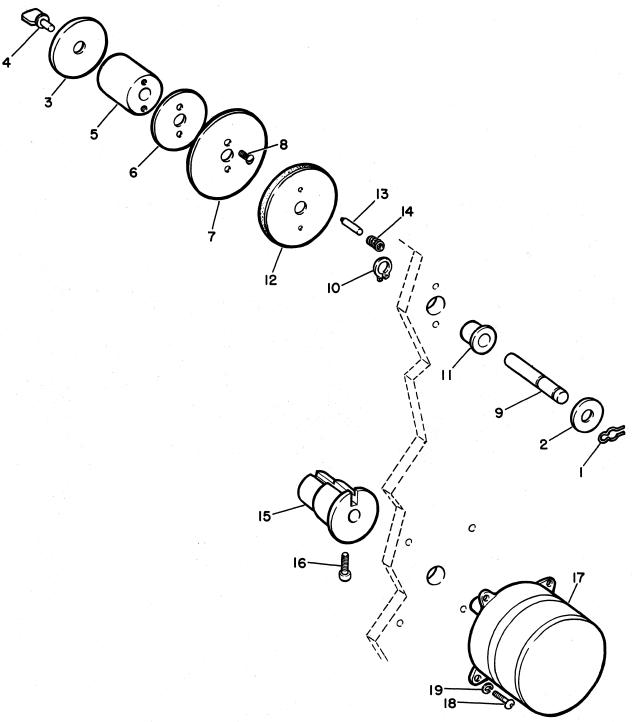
MYLAR FEED LAYOUT AND ASSEMBLY (REF. DSK-3074)-EXPLODED VIEW
